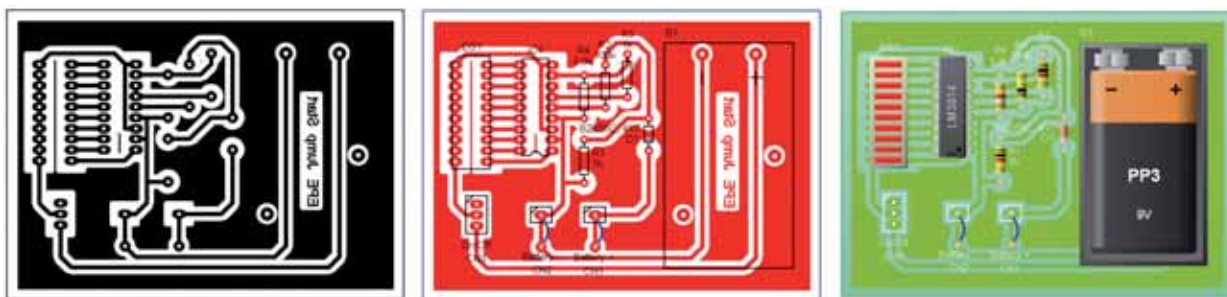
Complete PCB artwork in various views. The final size of the prototype board is 90mm × 60mm
